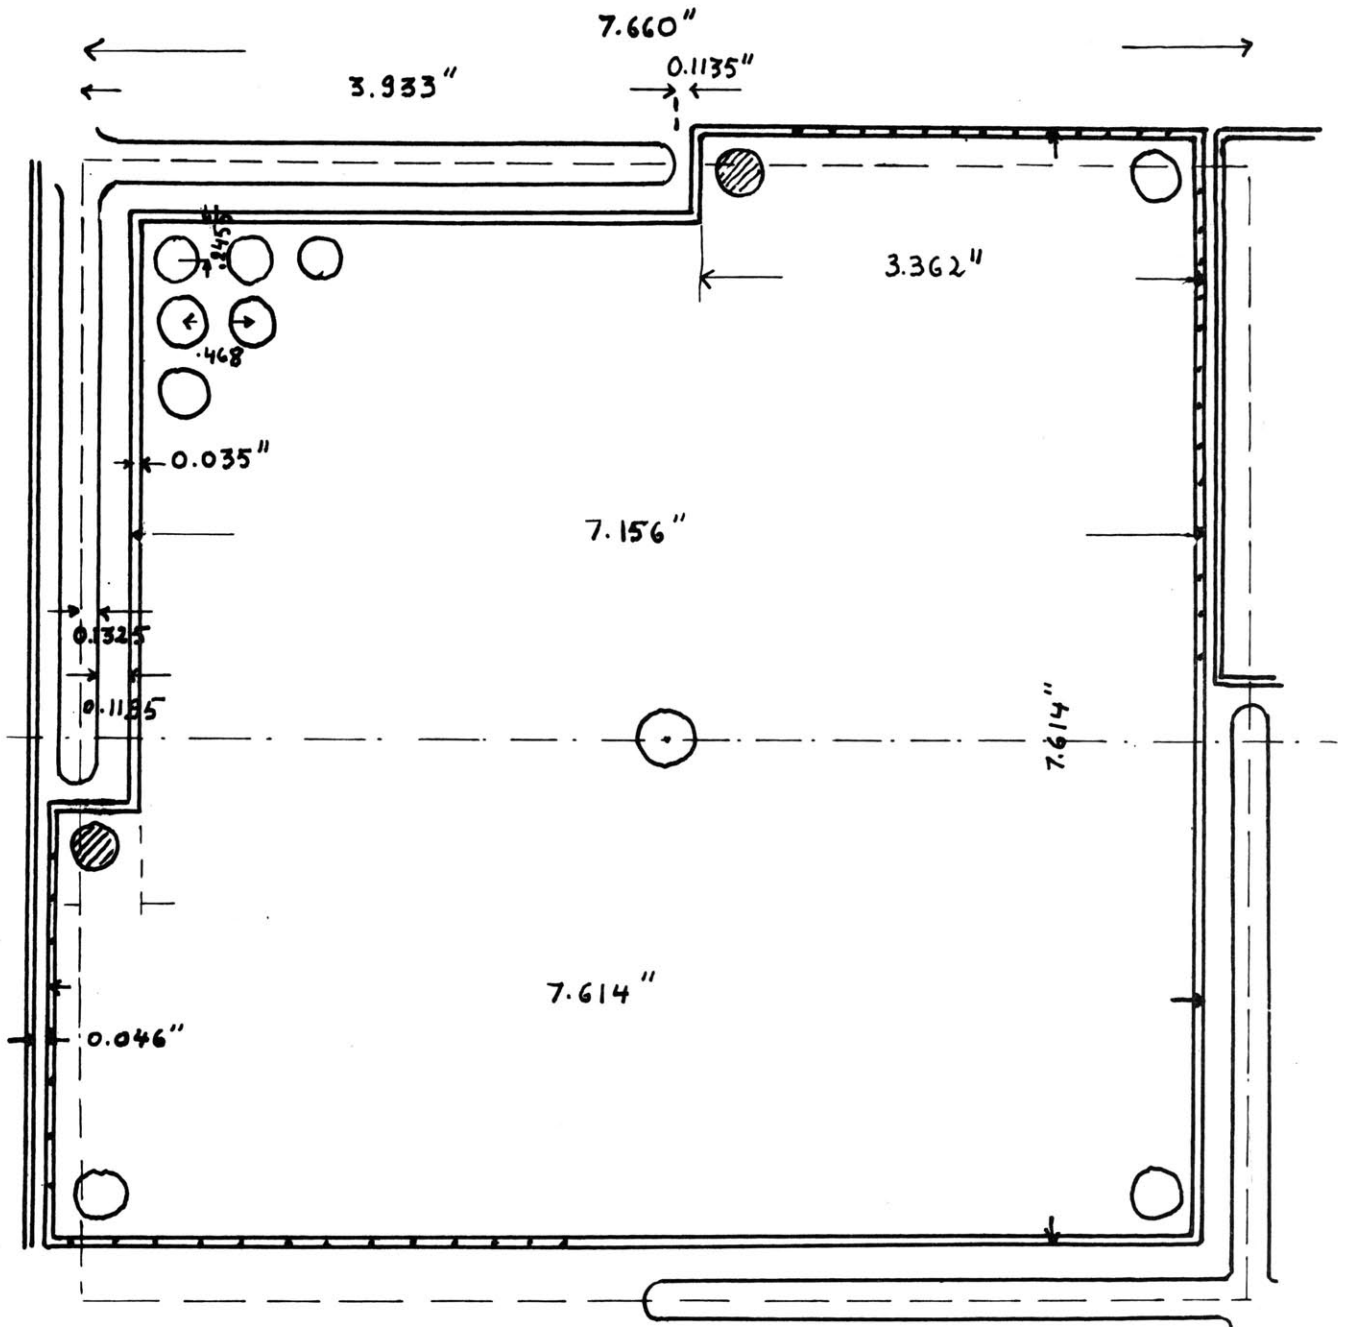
TYPE B ZIRCALLOY CLAD ASSEMBLIES SCALE =0.775/1
